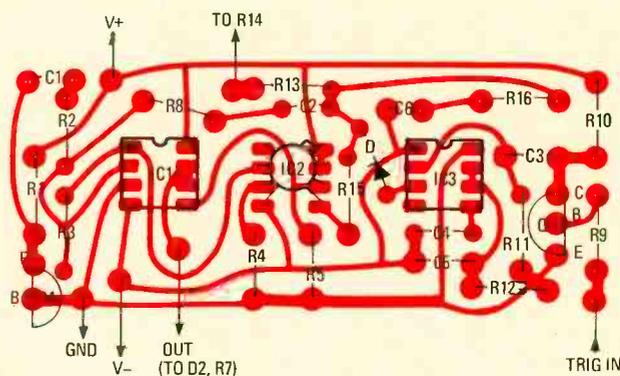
COMPONENT LAYOUT for the Snare simulator accessory.
